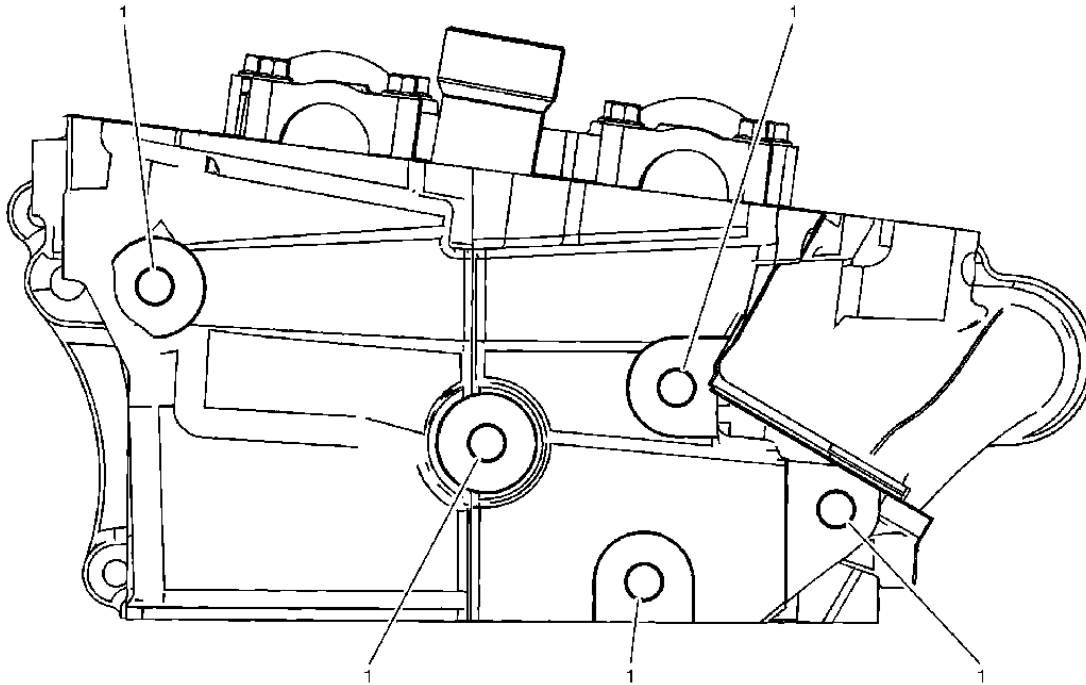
Identifying Left Cylinder Head Exhaust Face
